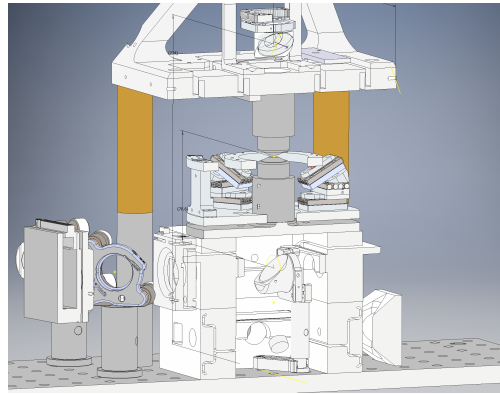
Inside view of the mechanical construction of the objective mounting frame.
